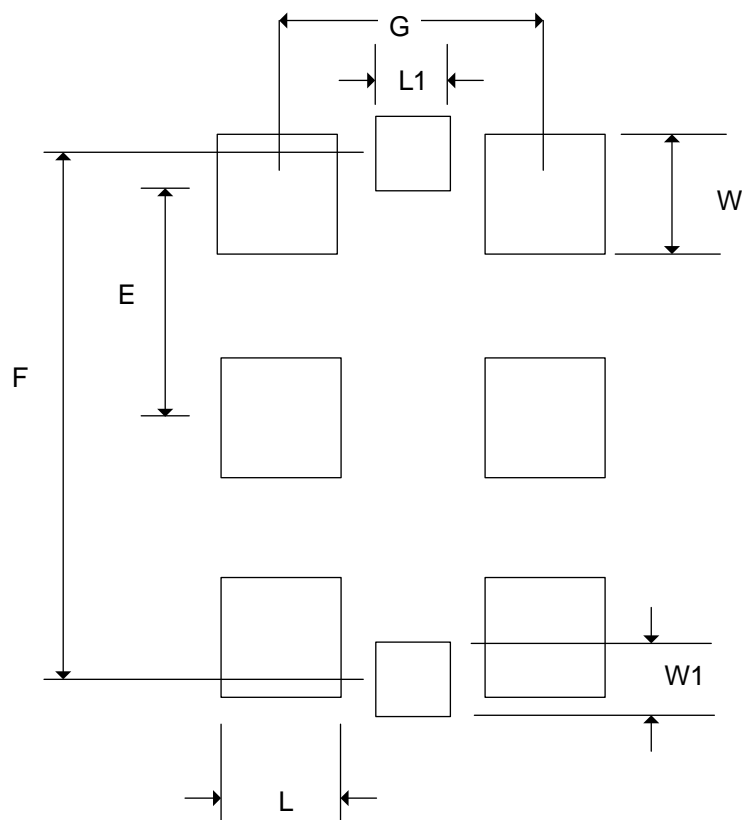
MS1310 Packaging Land Pattern Drawing (3.2mm x 2.5mm)
